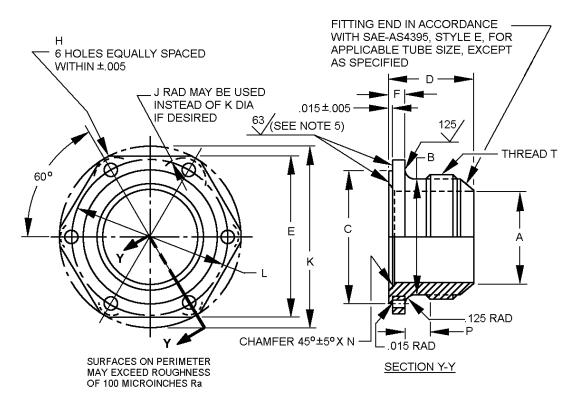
Adapter straight flange to tube dimensions and configurations.
